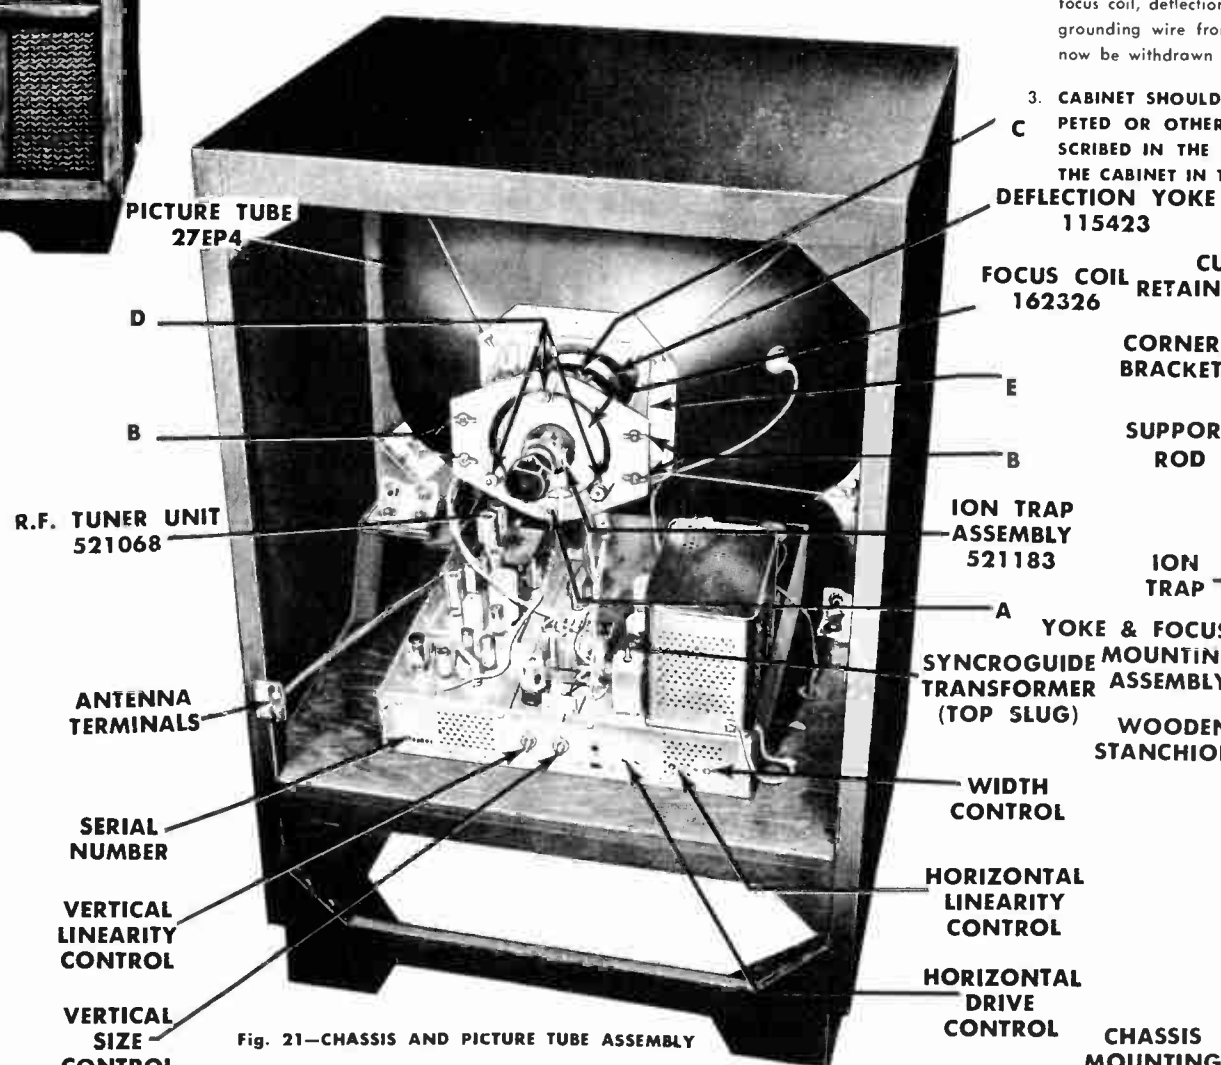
CHASSIS AND PICTURE TUBE ASSEMBLY
